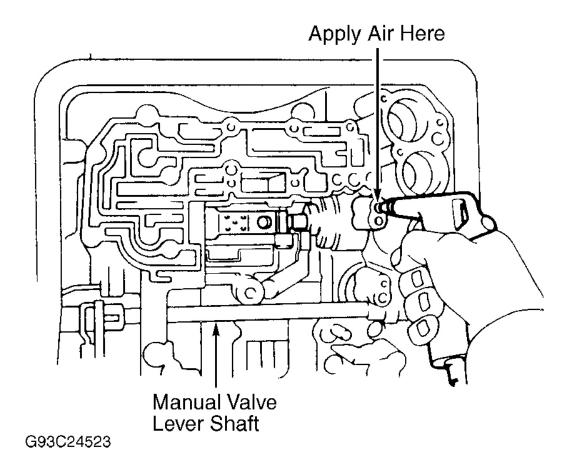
Checking 2nd Coast Brake Band Courtesy of TOYOTA MOTOR SALES, U.S.A. INC.
